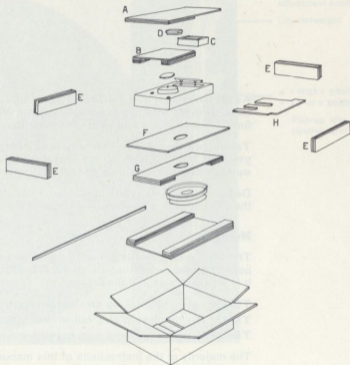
Packing of the TD-150 AB and TD-150 B turntables.
